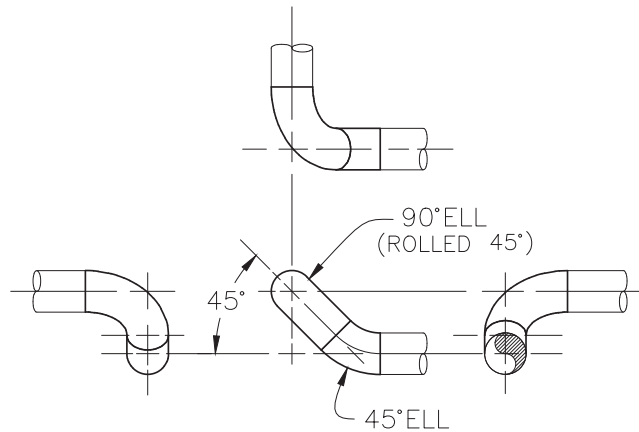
90° and 45° elbows welded together.
